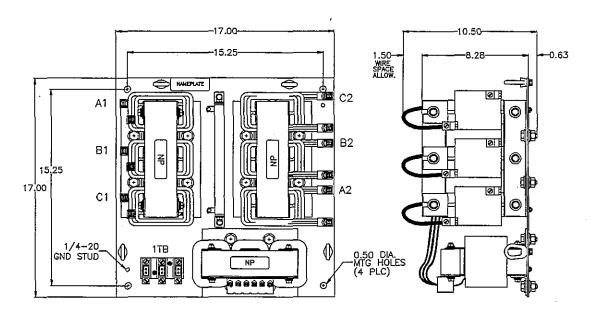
50 - 60 HP, 480 VAC Outline Drawing All dimensions are in inches
